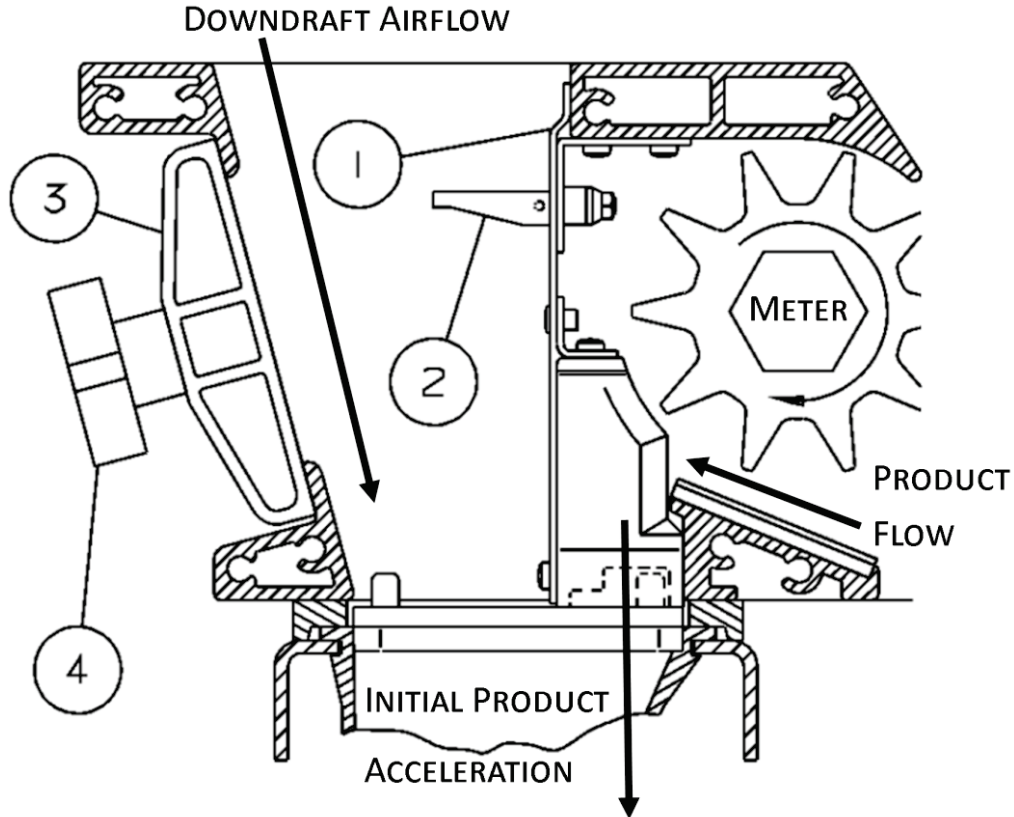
Cross-section of a CNH meter box (1. Baffle Panel 2. Retainer latch 3. Inspection cover 4. Fastener knobs). Adapted from the Flexi-Coil air-cart assembly instructions (Flexi-Coil 2011)
